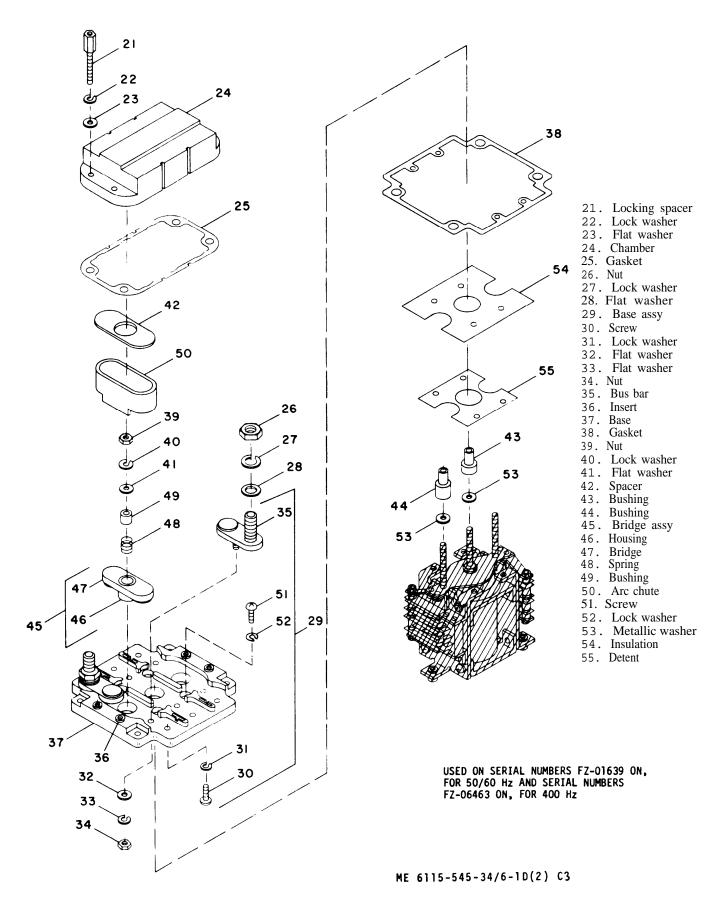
ID. Main Load Contactor (Sheet 2 of 3)
